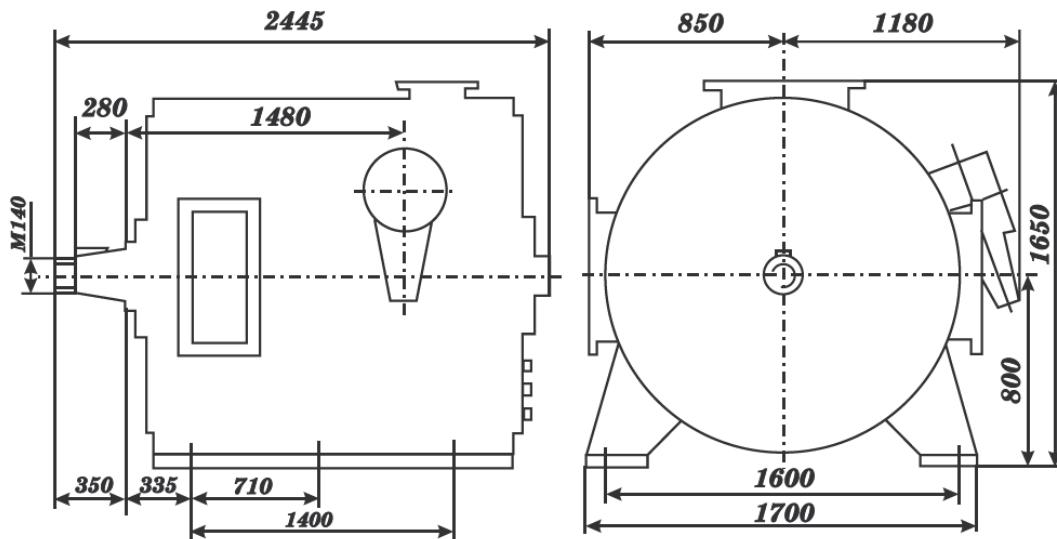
Overall and mounting dimensions of the motor AKDE-16-62-10.
